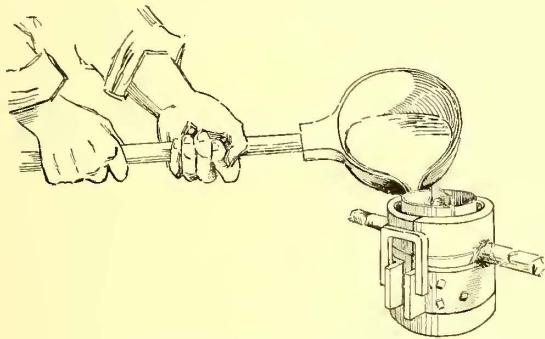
CASTING BABBITT IN ARMATURE BOXES.
